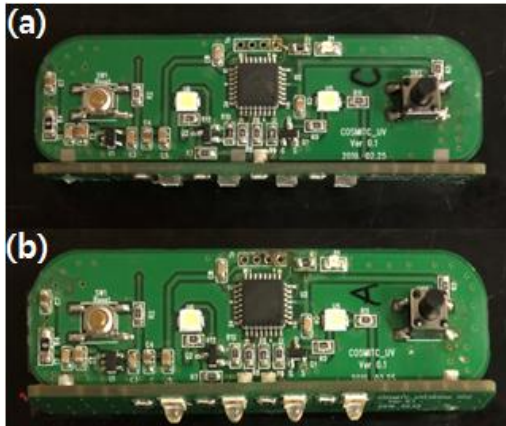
UVA, UVC machines. (a) UVC machine. (b) UVA machine.
